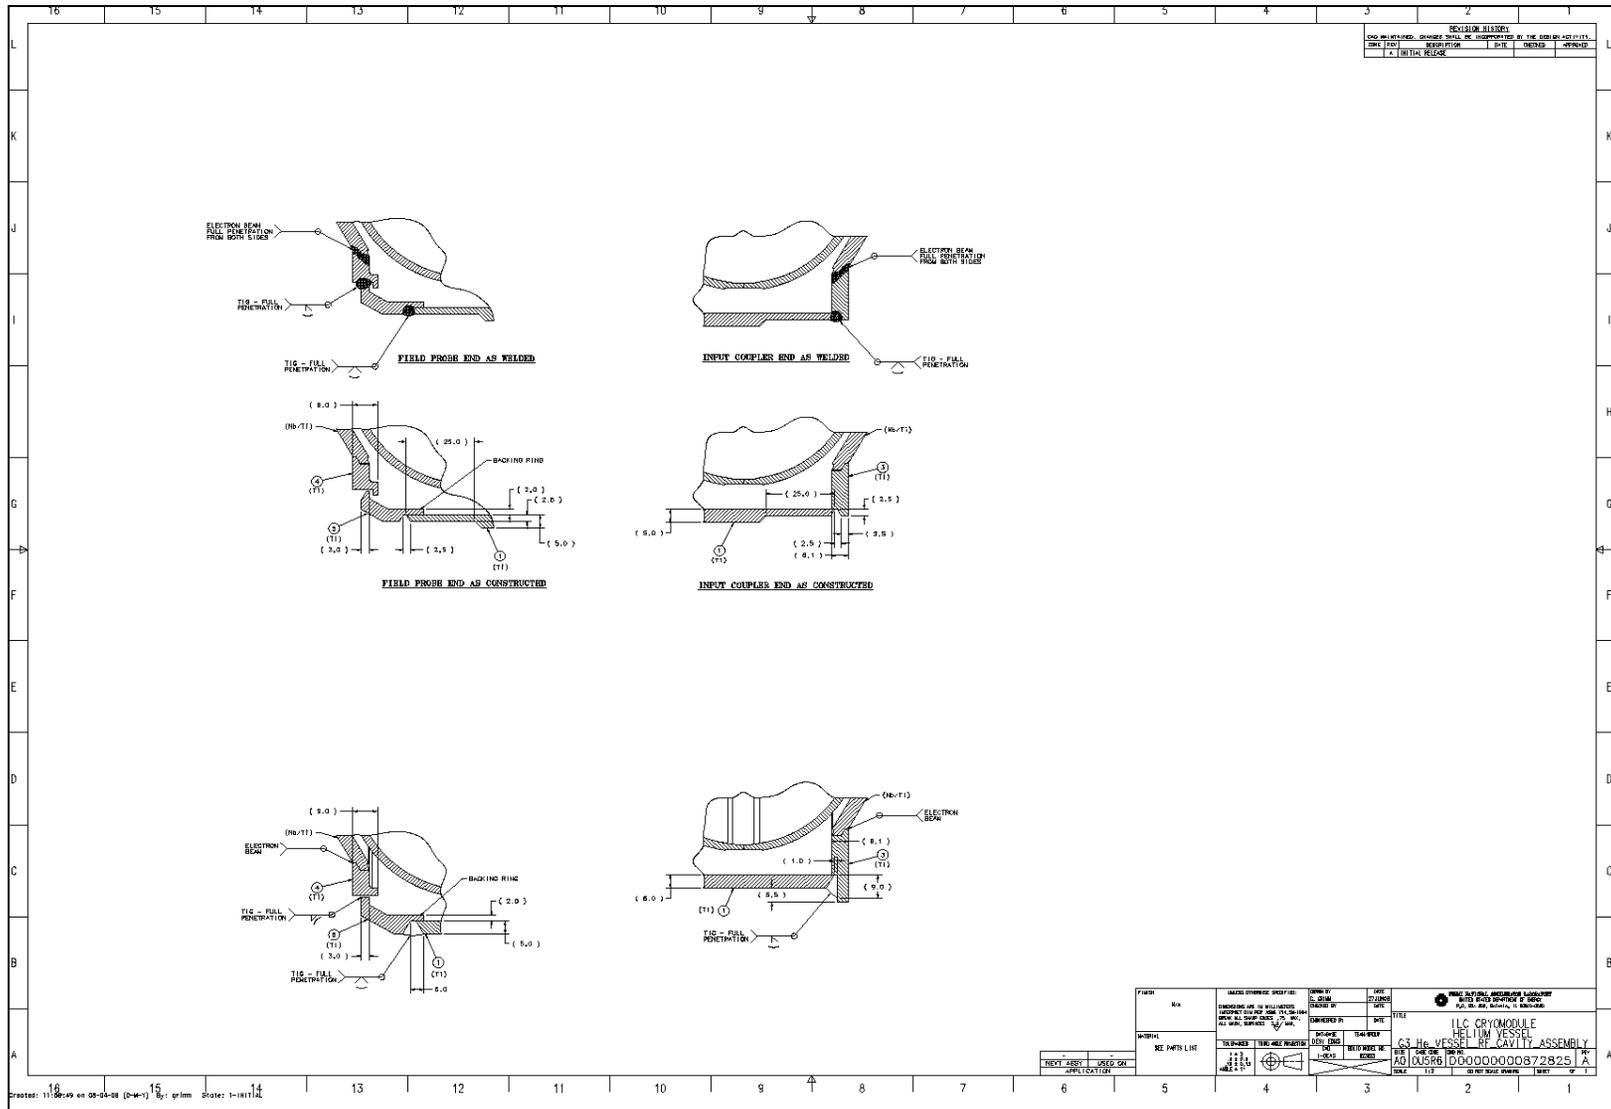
G3 Helium Vessel RF Cavity Assembly (Drawing 872825 – Sheet 2)
